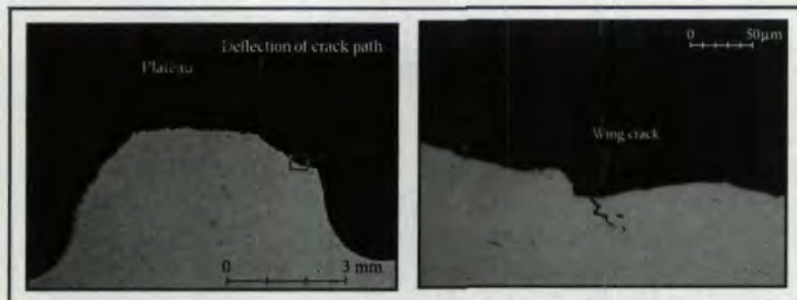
Close-up of a cross-section of a TIFF. The wing crack indicates the propagation direction of the main crack (from the interior of the tooth towards the flank).
